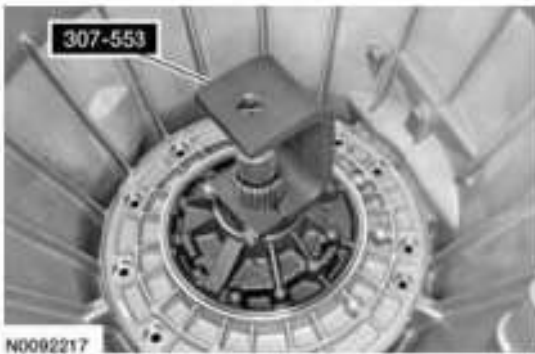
Identifying Transmission Fluid Pump Remover 307-553 On Front Pump
